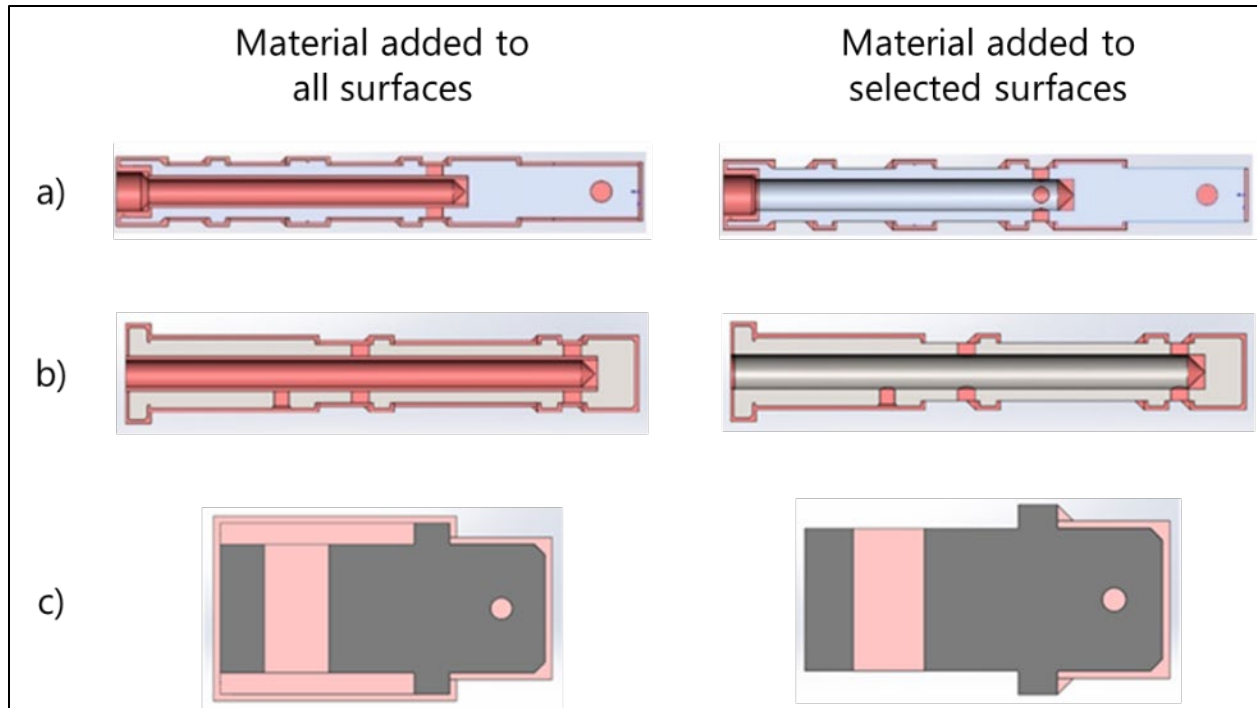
Schematic showing the two approaches for adding material to the 3D models for printing of the stainless steel governor parts: (a) gate limit valve piston; (b) pilot valve pin; (c) pilot valve linking bar.
